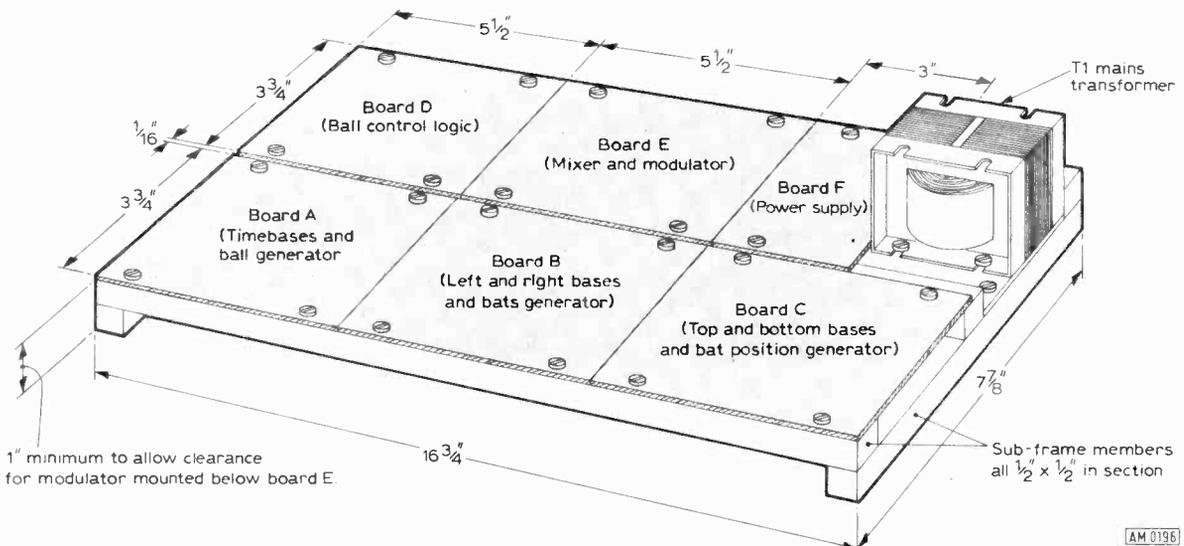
Layout of printed circuit boards and mains transformer on the subframe. In the prototype this was made from aluminium bar but any material of similar size may be used.
